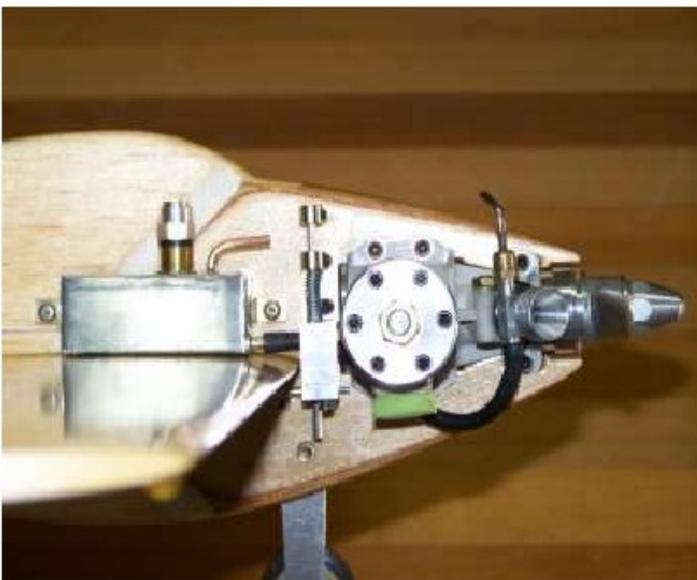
Installed shutoff as fitted to the airplane. Note that the position of the mounting screws in the bonded mounting plate allows assembly access. To avoid
